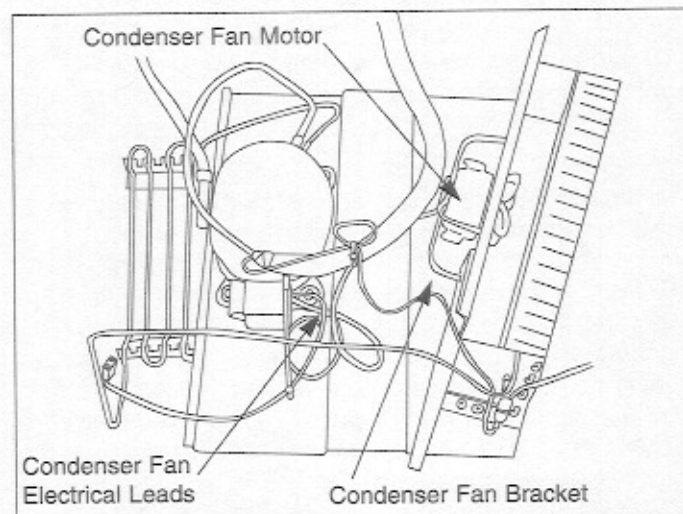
Model 601R, 601F Condenser Fan Removal
